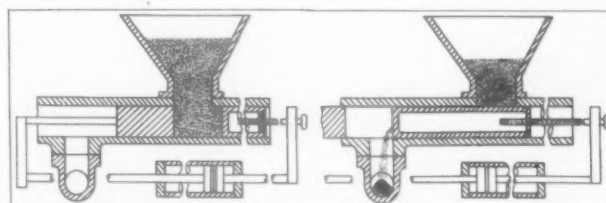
, left. The preform cylinder and mechanism—an integral part of the Rockford Hy-Jector. Actual position of the preform cylinder is beneath and at right angles to the measuring cylinder. At right; when material is received into the preform cylinder, its plunger moves forward, compressing the material into a preform. Correct pressure—achieved through adjustable controls—is automatic for any size preform and assures correct preform density.
